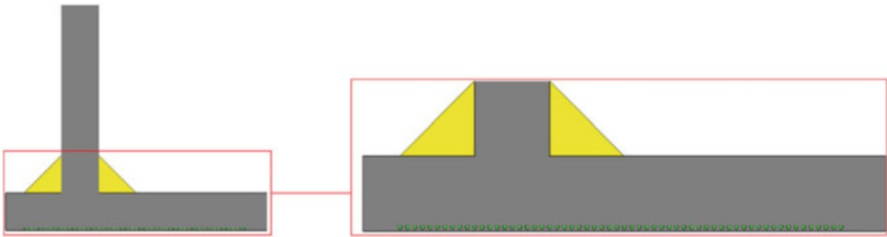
Location of the sensors for the inspection of the welding joints
